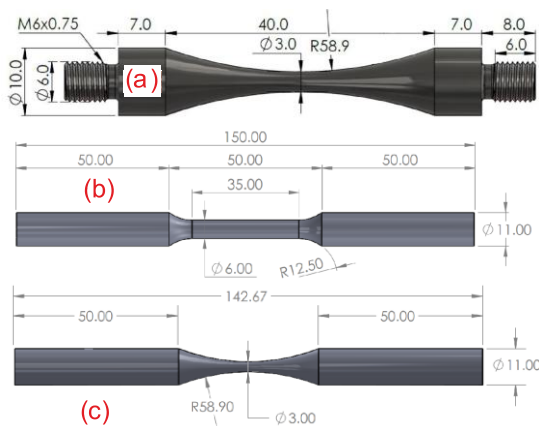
Dimensions of the (a) USF testing specimen; (b) S355JR 20Hz specimen; and (c) Q355B 20Hz specimen.
